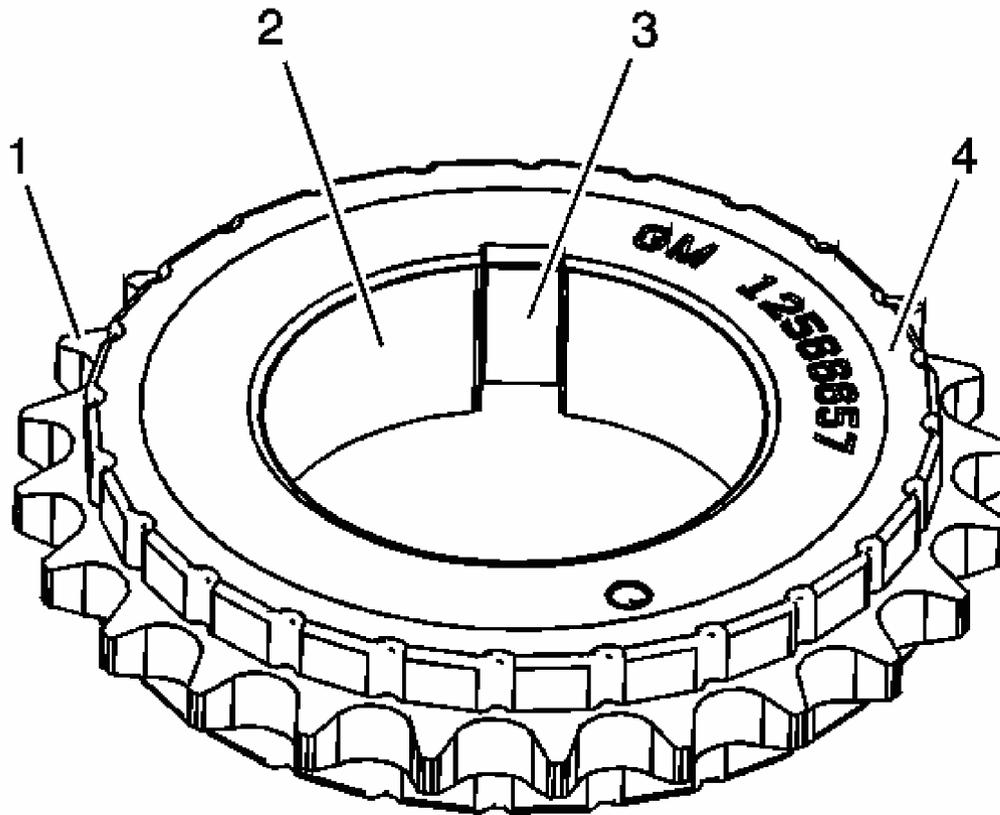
Inspecting Crankshaft Sprocket With Primary Roller Chain
